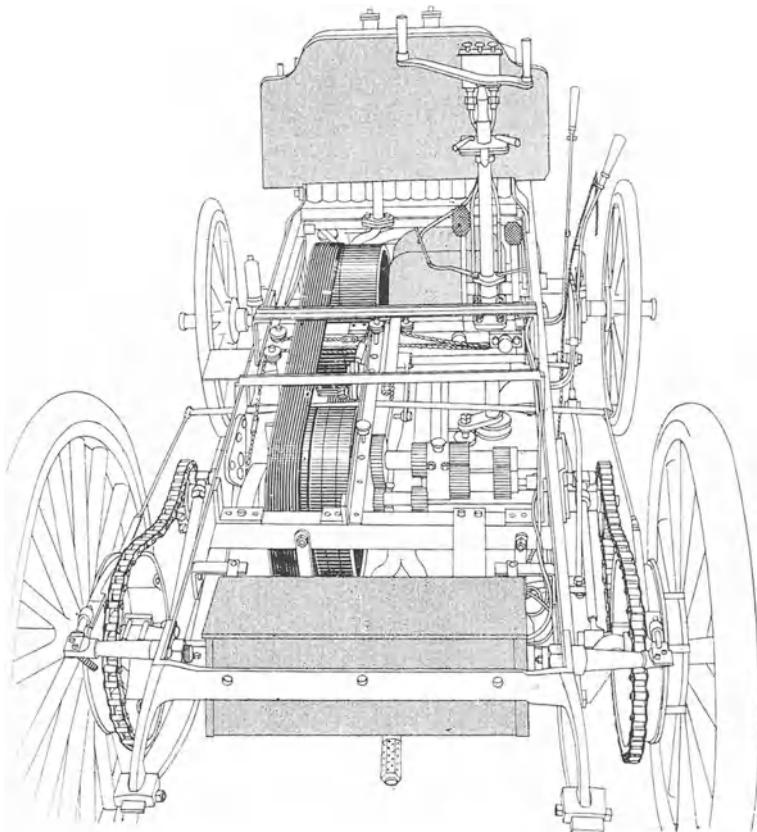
Complete transmission of a Panhard & Levassor prototype, including a first stage with belt drive, operating as a clutch, a gearbox and a second stage with chain drive (redrawn from Baudry de Saunier 1900)
